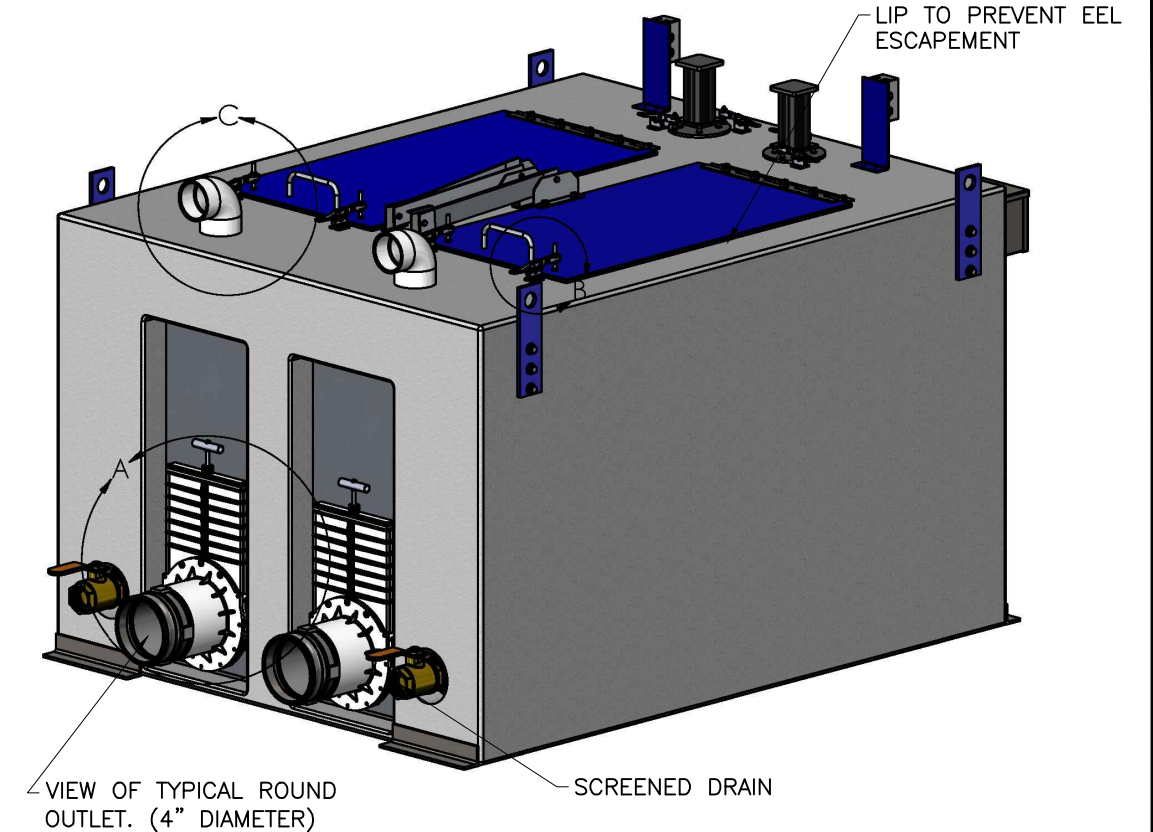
ISOMETRIC VIEW OF REIFF MANUFACTURING TRANSPORT TANK
